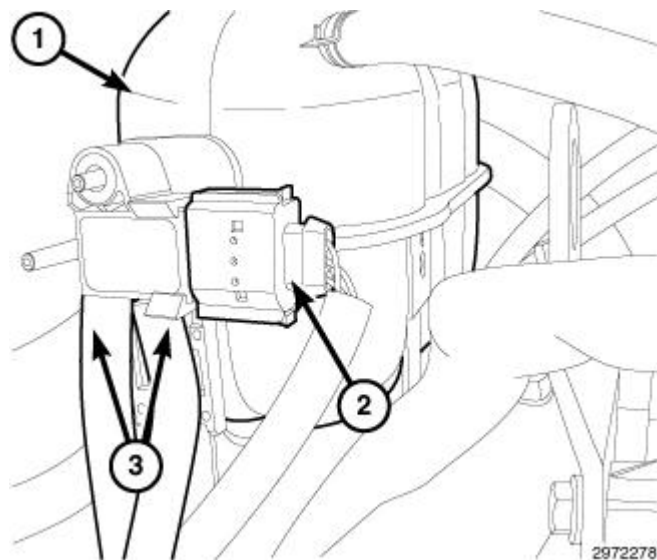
Differential Pressure Sensor Hoses & Harness Connector
